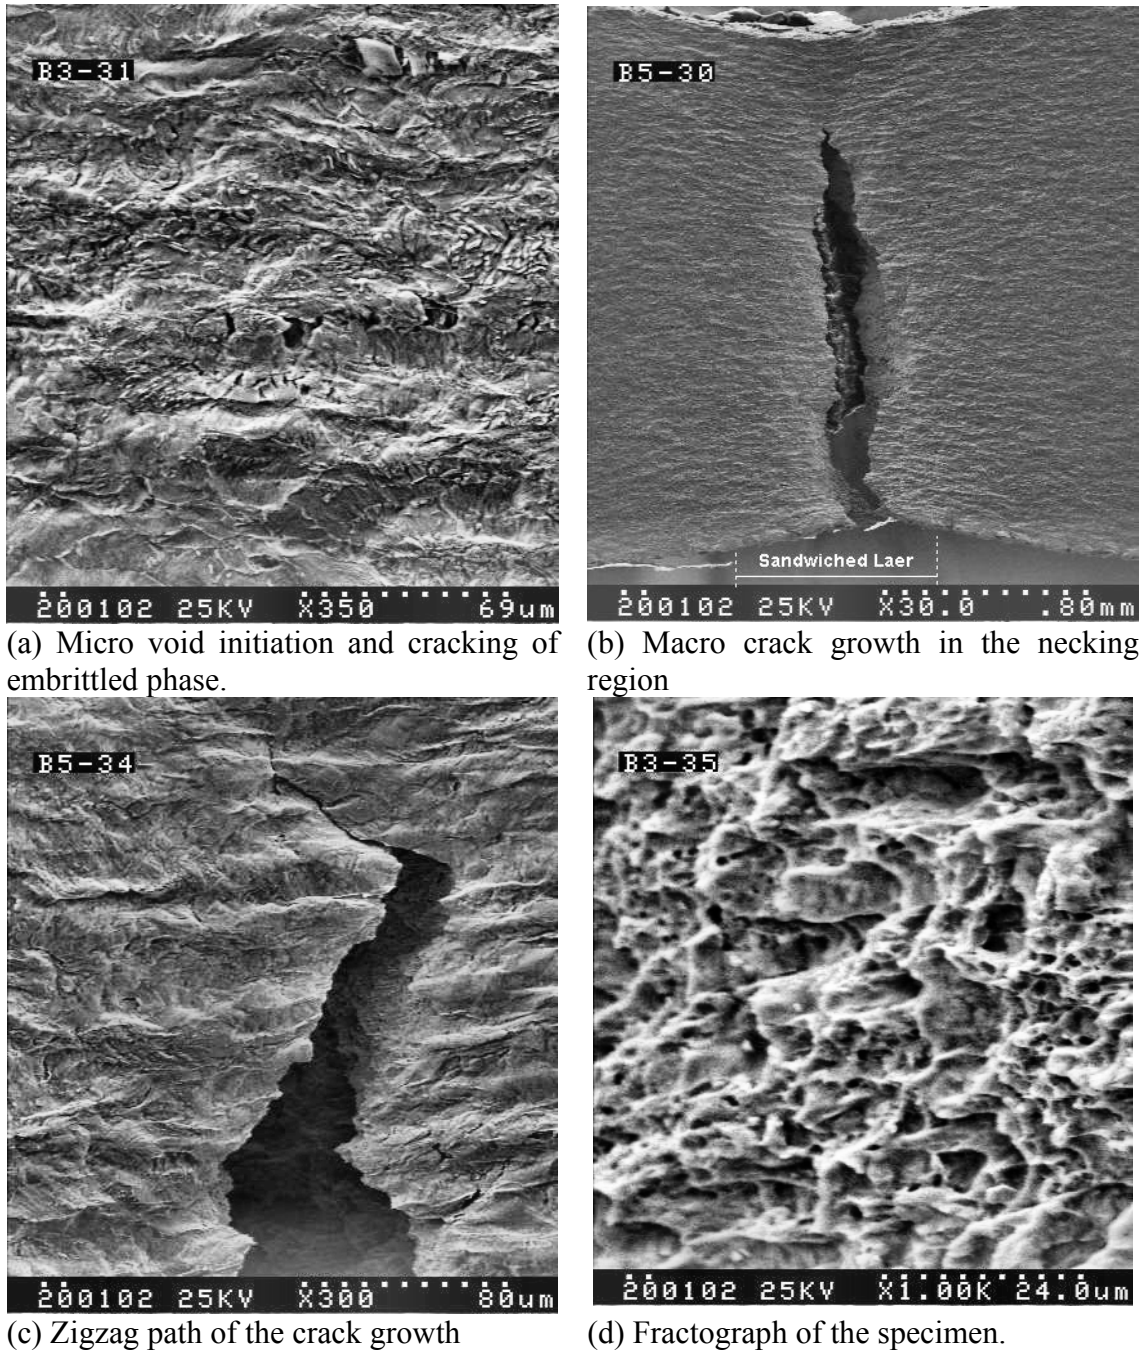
Damage and failure of a under matched specimen with a sandwich layer width of 5.0mm.
